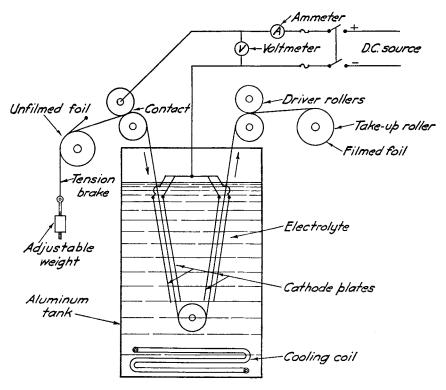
Schematic drawing of a machine for the continuous filming of aluminum foil.
